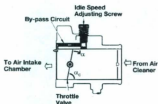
Throttle Body Side View (based on image courtesy of Toyota Motor Sales)
